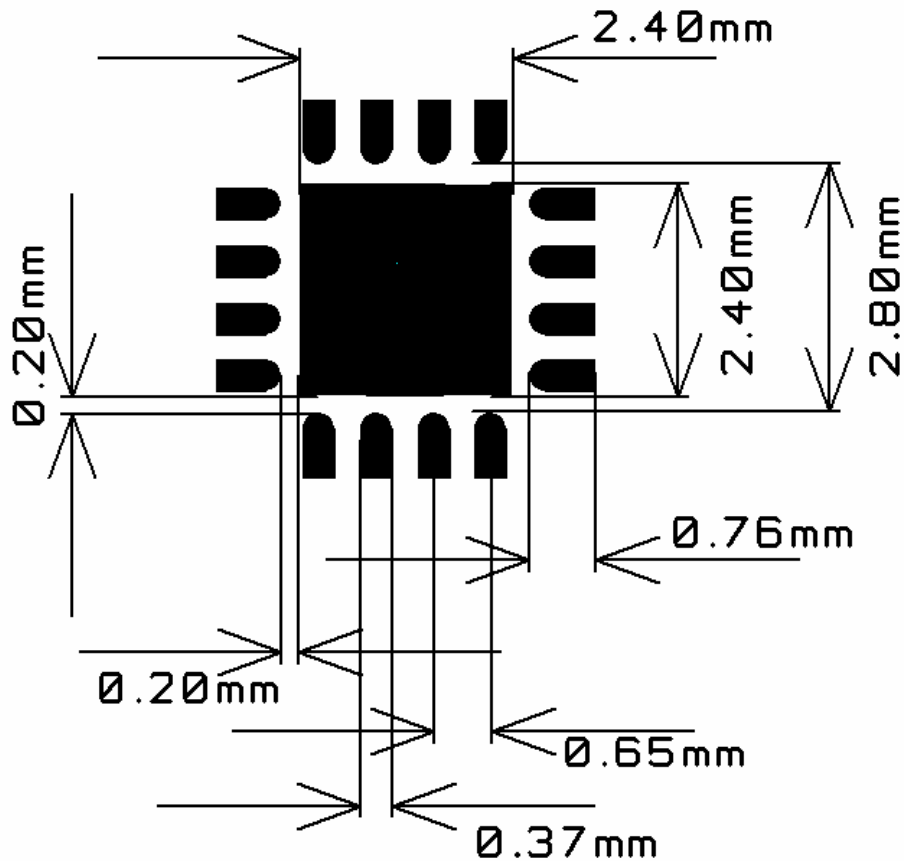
Package dimensions drawing (the actual package has 16 pins)
